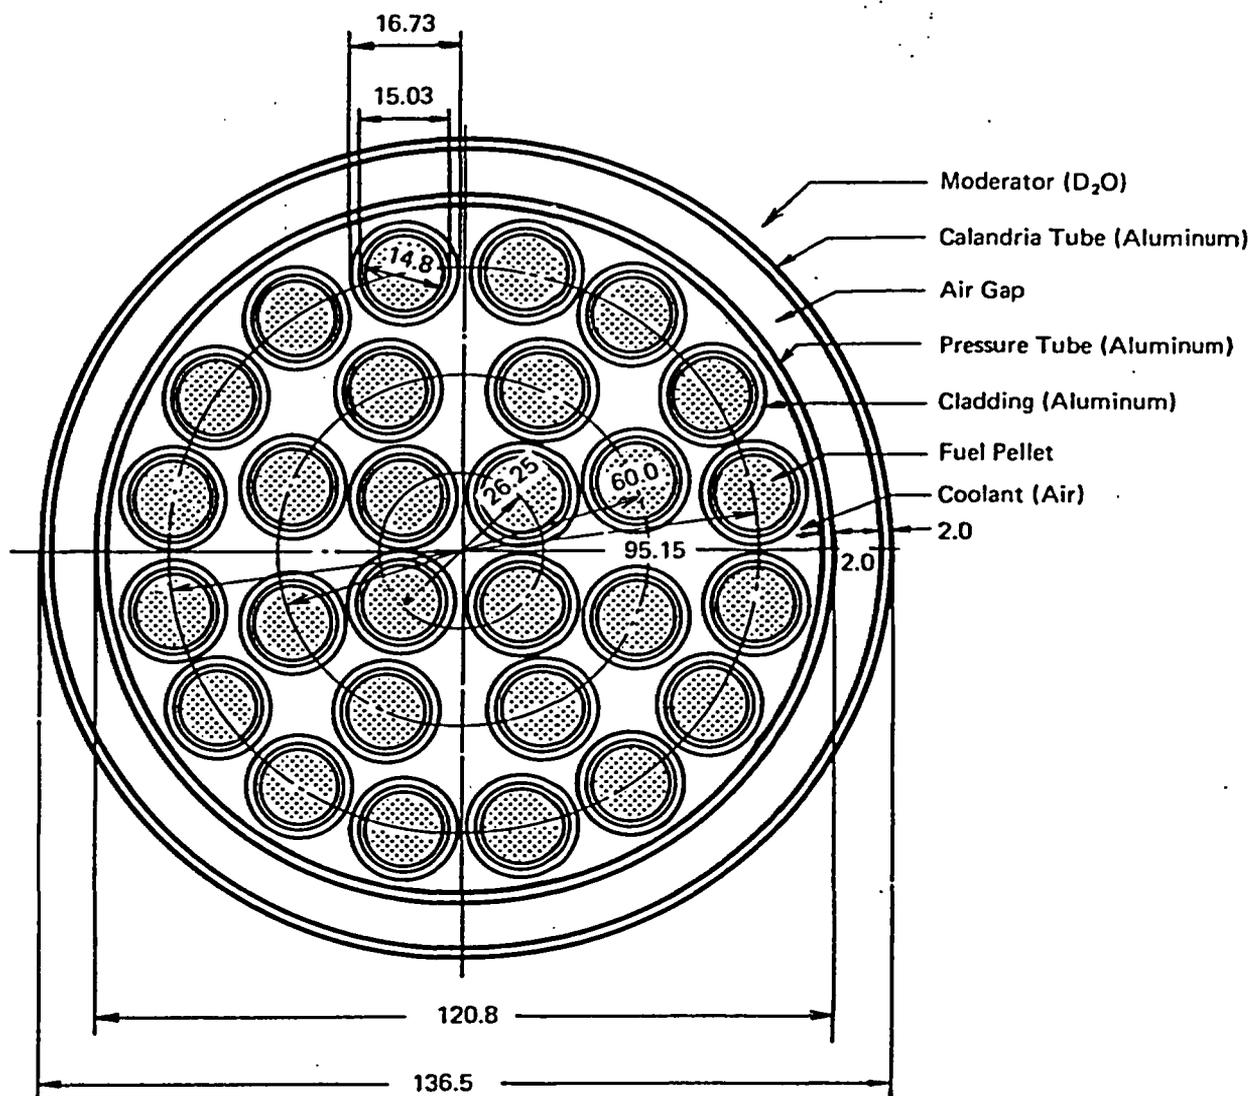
Cross-sectional view of a 28-pin driver fuel cluster. (Dimensions are in millimetres.)
